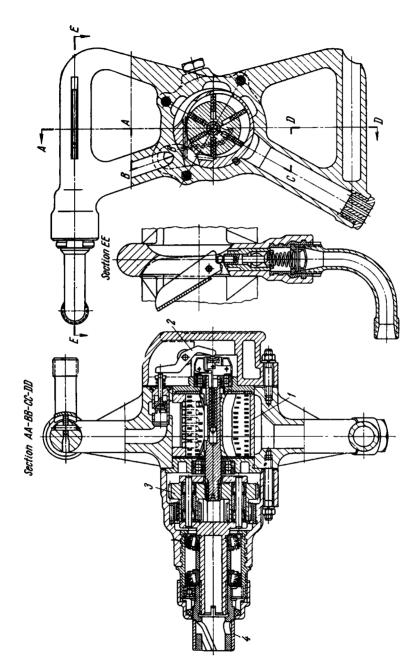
CIIP-11 (SPR-11) hand-held pneumatic drill
